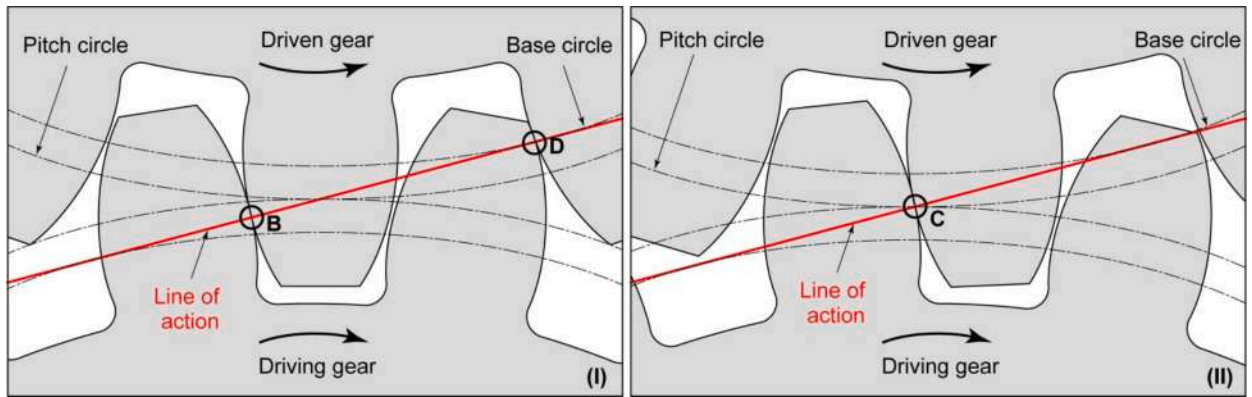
Contact points along the line of action at the pitch (C) and at the inner point of single pair tooth contact for the driving gear (B) and the driven gear (D).
